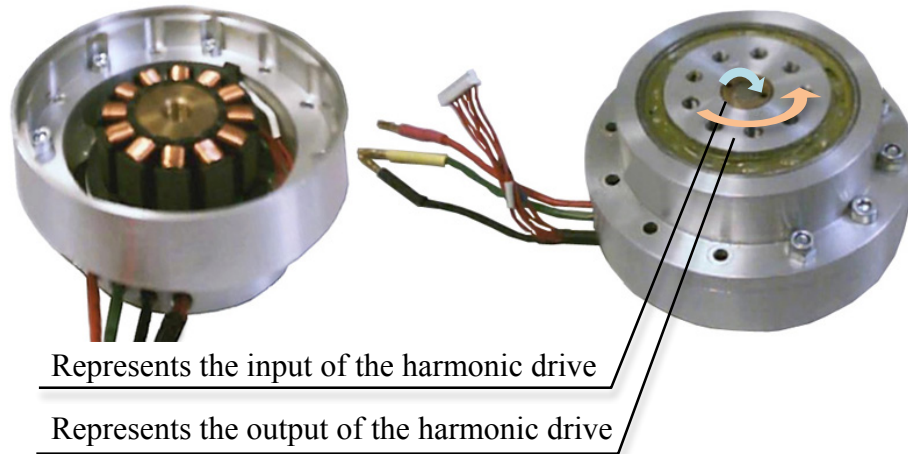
The brushless motor combined with a harmonic gear drive.
